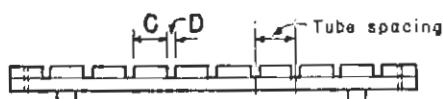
FORMING BENCH FOR SINUOUS RADIANT HEATING COILS USING COPPER WATER TUBE
